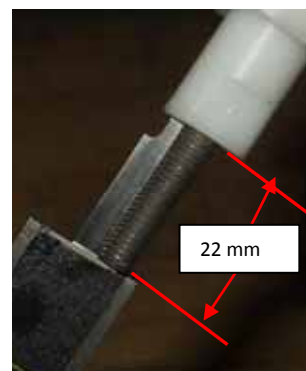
Front and Rear Spring Adjustment if Back Angle cannot be Held
